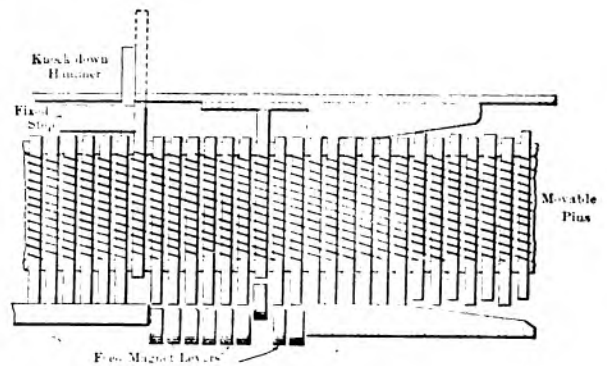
THEORY OF PERFORATOR PAPER FEED DEVICE.
